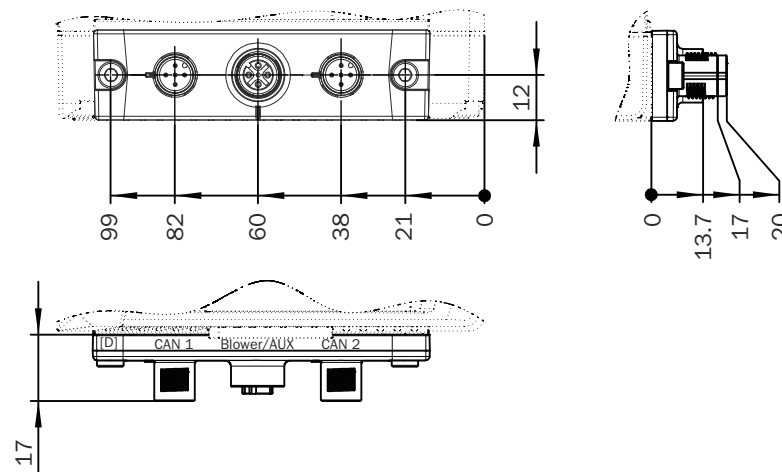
Dimensions of cloning plug D (M12), all dimensions in mm
